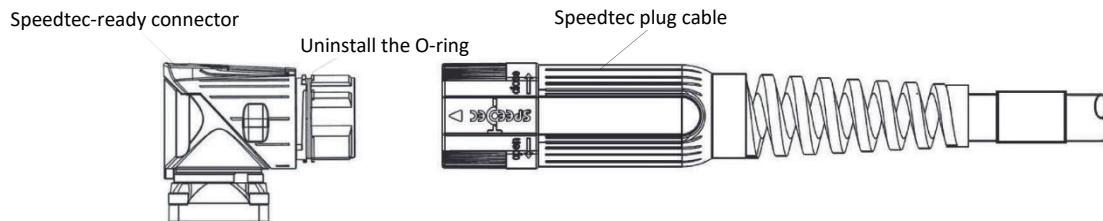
Speedtec-ready motor connector with O-ring uninstalled
